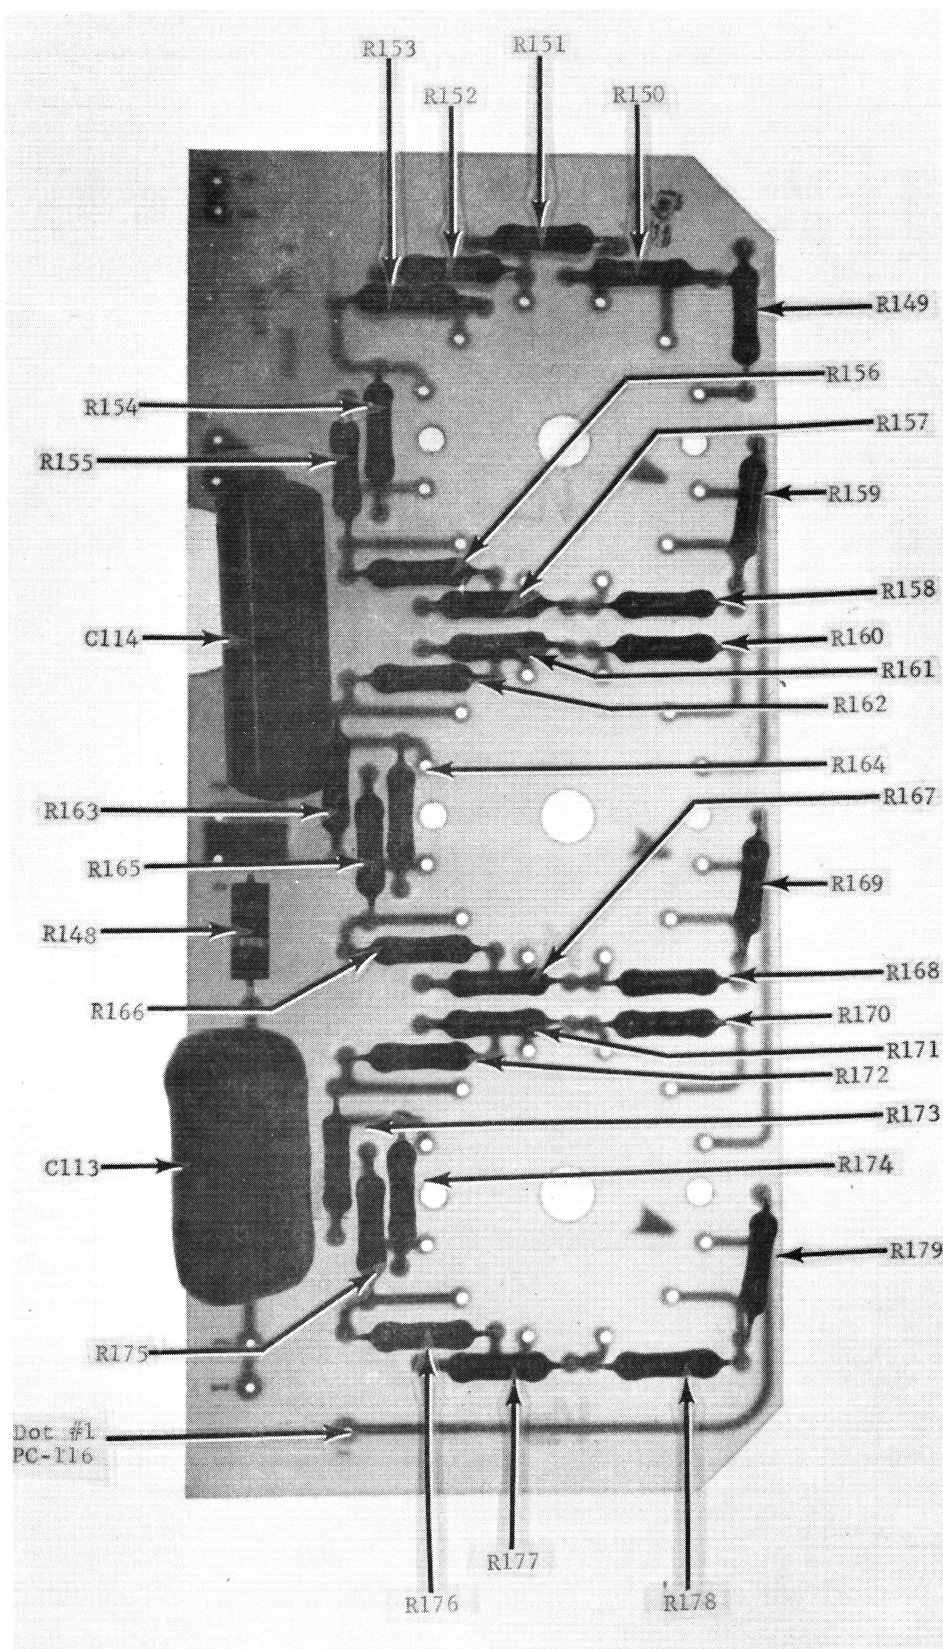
Component Locations on Printed Circuit Board PC-116.
